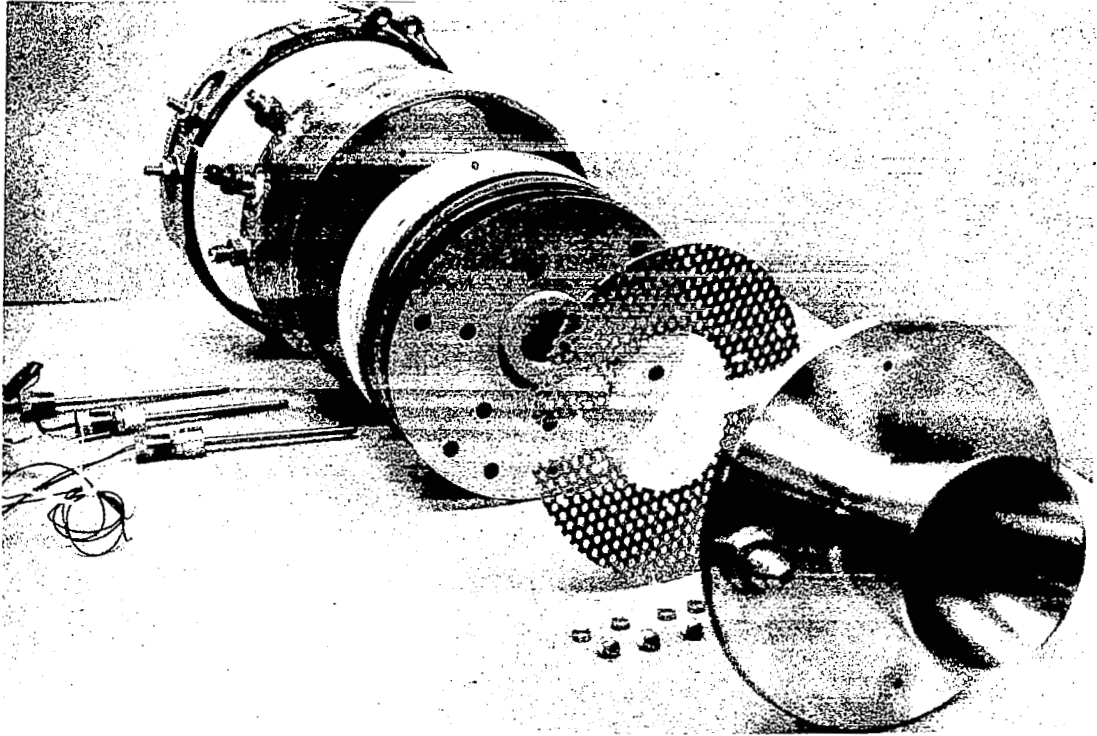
EXPLODED VIEW OF PROPELLANT FEED SYSTEM
